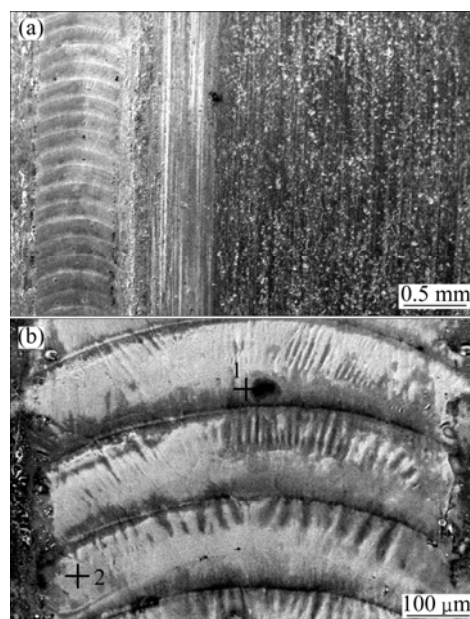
Optical images of weld joint of Si–SiC/Al hybrid composites with different magnifications
